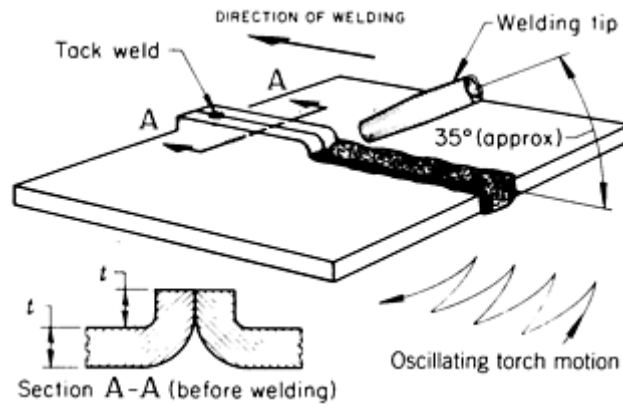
OXYFUEL GAS WELDING PRACTICE USED TO PRODUCE A SHORT-FLANGED-EDGE BUTT JOINT IN THIN SHEET MATERIAL (≤ 2.4 MM, OR $\frac{3}{32}$ IN., THICK)
